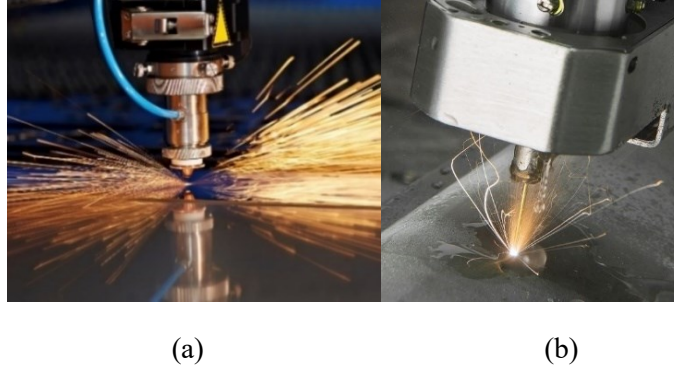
Laser Beam Machining (a) and Electro Discharge Machining (b).
